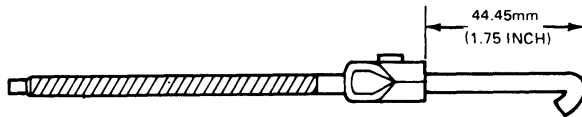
PARKING BRAKE INITIAL ADJUSTMENT
